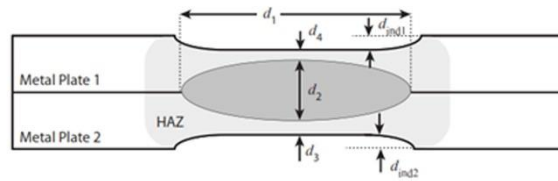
schematic representation of a spot weld between two plates[4]
